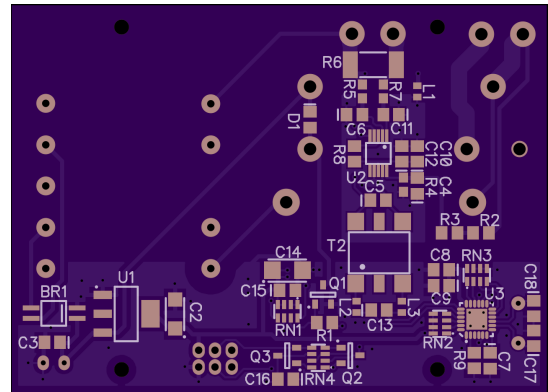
The bottom layer of the designed PCB (client node), exposing mainly SMT components
